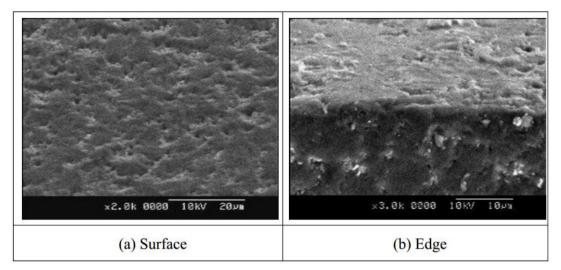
EDMed surfaces of boron doped PCD sample[53]
